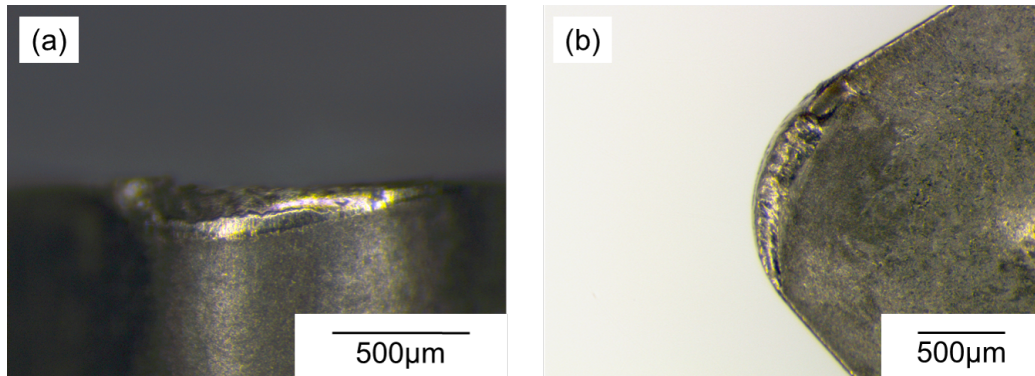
Microscope images showing the degree of tool wear after trial prep 7 on billet 4.1. Showing (a) the flank face and (b) the rake face.
